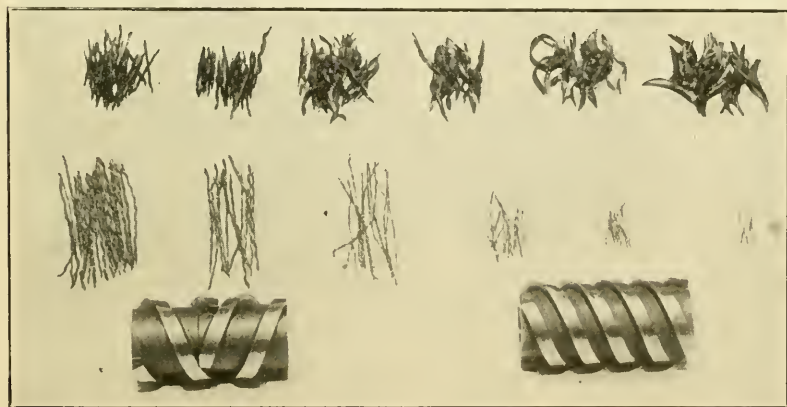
HELICAL CUTTERS, SINGLE AND INTERLOCKED, AND CHIPS PRODUCED BY THEM
